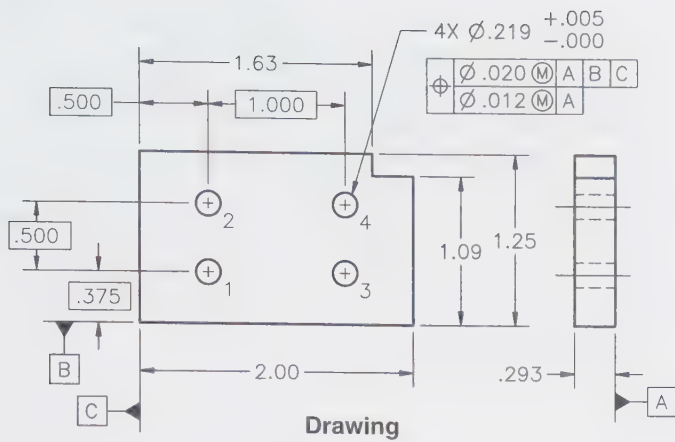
shows a four-hole pattern with a composite tolerance applied to it. Data from a produced part is entered into the two tables. Inspection data may be received in a format that is not easily utilized, and in such cases putting that data in a table can make it easier to complete the evaluation of the information. The tables shown in the given figure are formatted for the convenience of explaining concepts and to fit the available space. They may not be optimum for handling large amounts of data.
